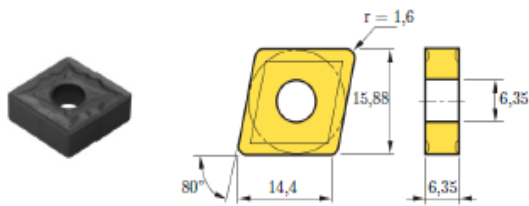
Cutting insert Korloy CNMG160616-HS [9]
